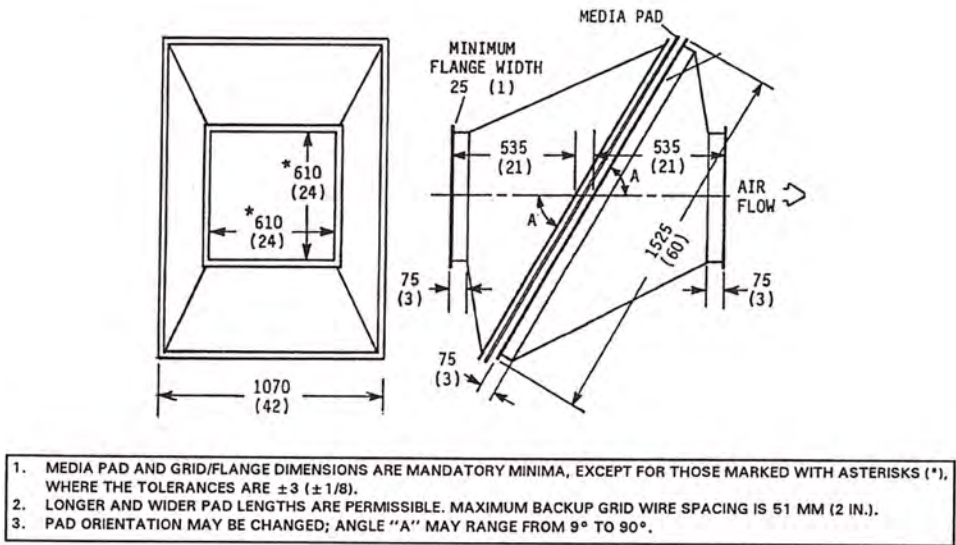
Final filter: flat sheet media form. Dimensions are in mm (in.).
